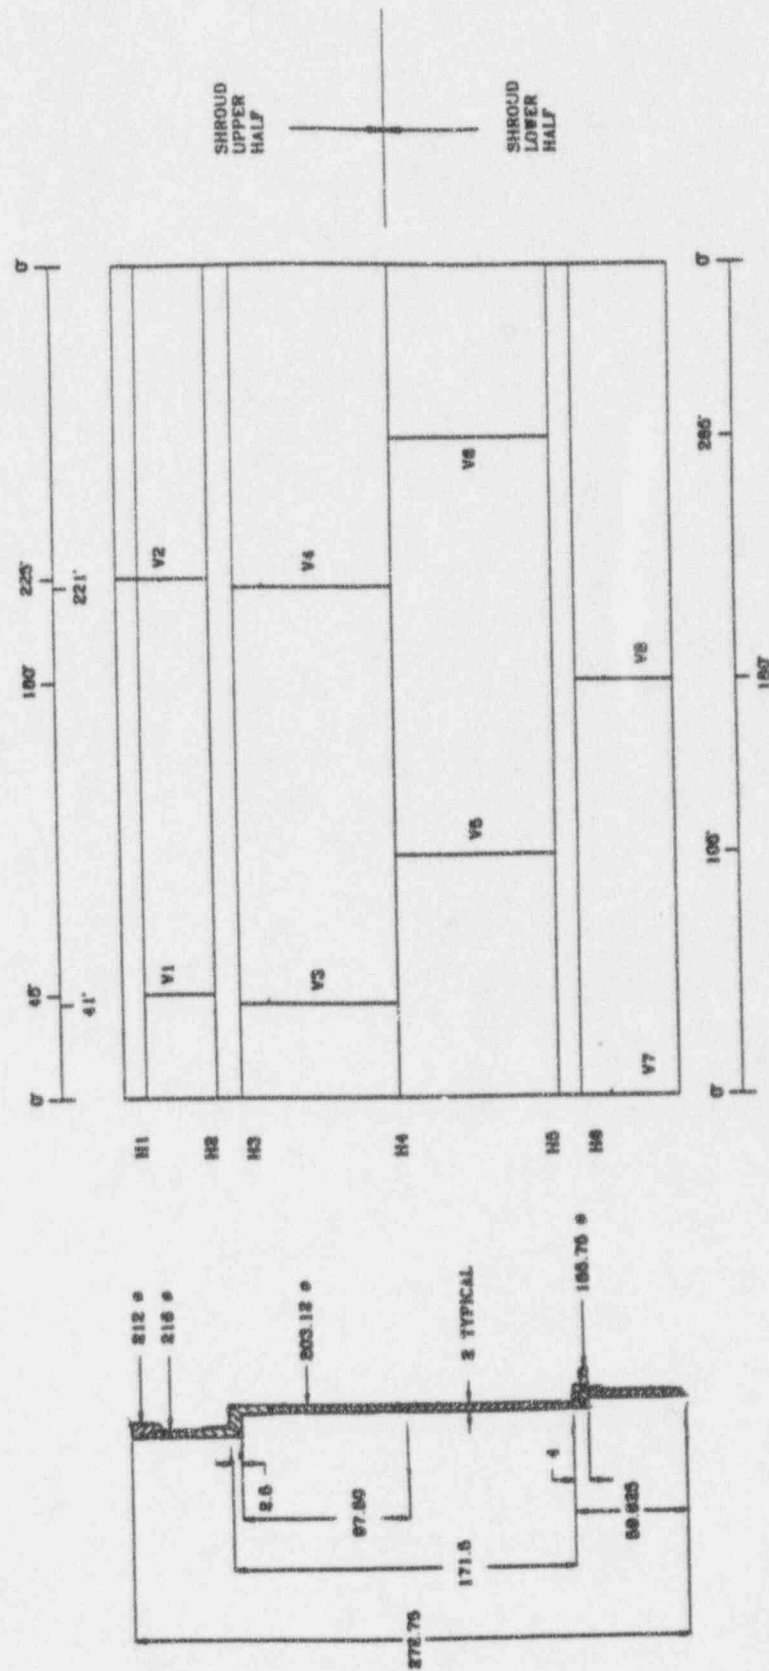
Schematic Showing Typical Welds in Core Shroud (Example 2)
